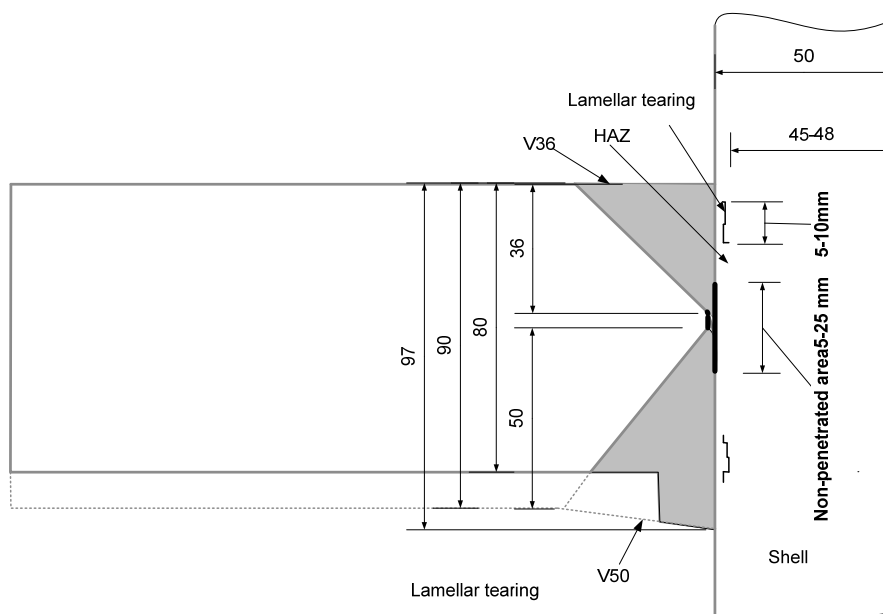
Appearance of lamellar tearing in the welded joint
